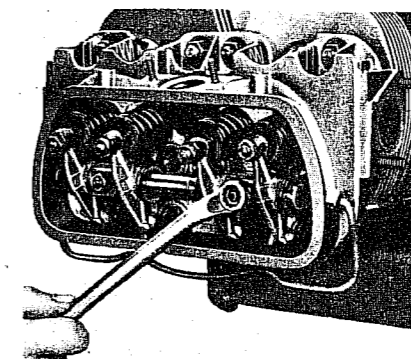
Removing the rocker assembly to gain access to the four cylinder head nuts.
